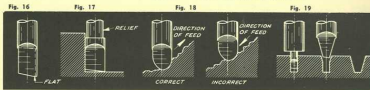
In milling irregular contours, etc., faster cutting will be done if the direction of feed is upward as shown, instead of down.
